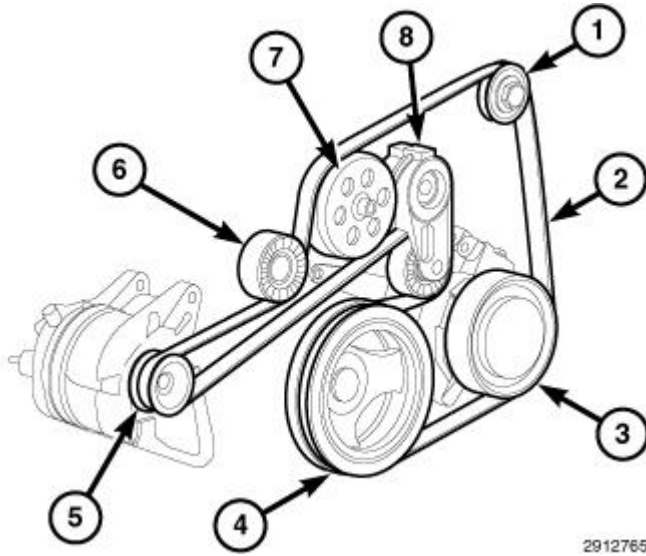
Drive Belt Tensioner And Drive Belt Routing
